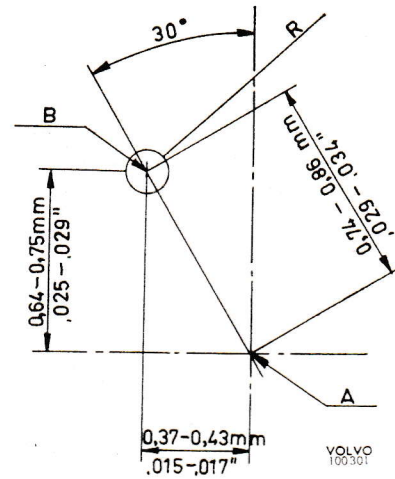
Eccentricity for rear brake linings on front wheels, bonded model.
